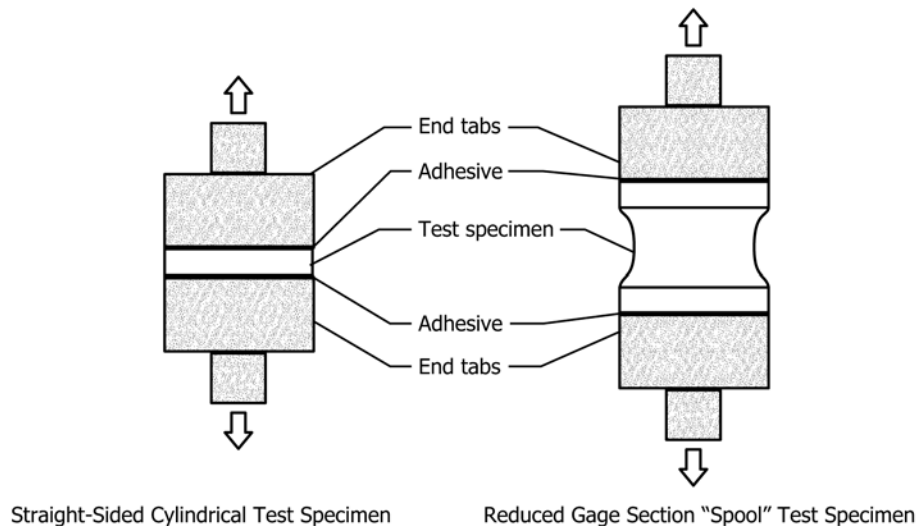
Flatwise Tension Specimen and End Tab Assembly
